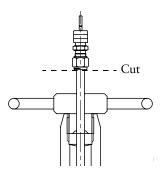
Longitudinal section through the tip of the adapter rod.
